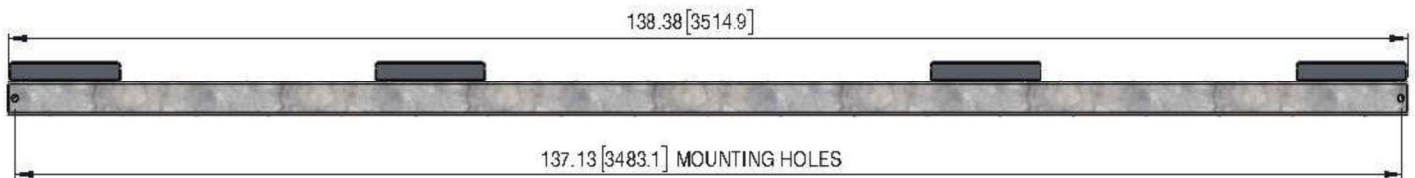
6 Module Steel Tube Rail Mounting Holes – Front
